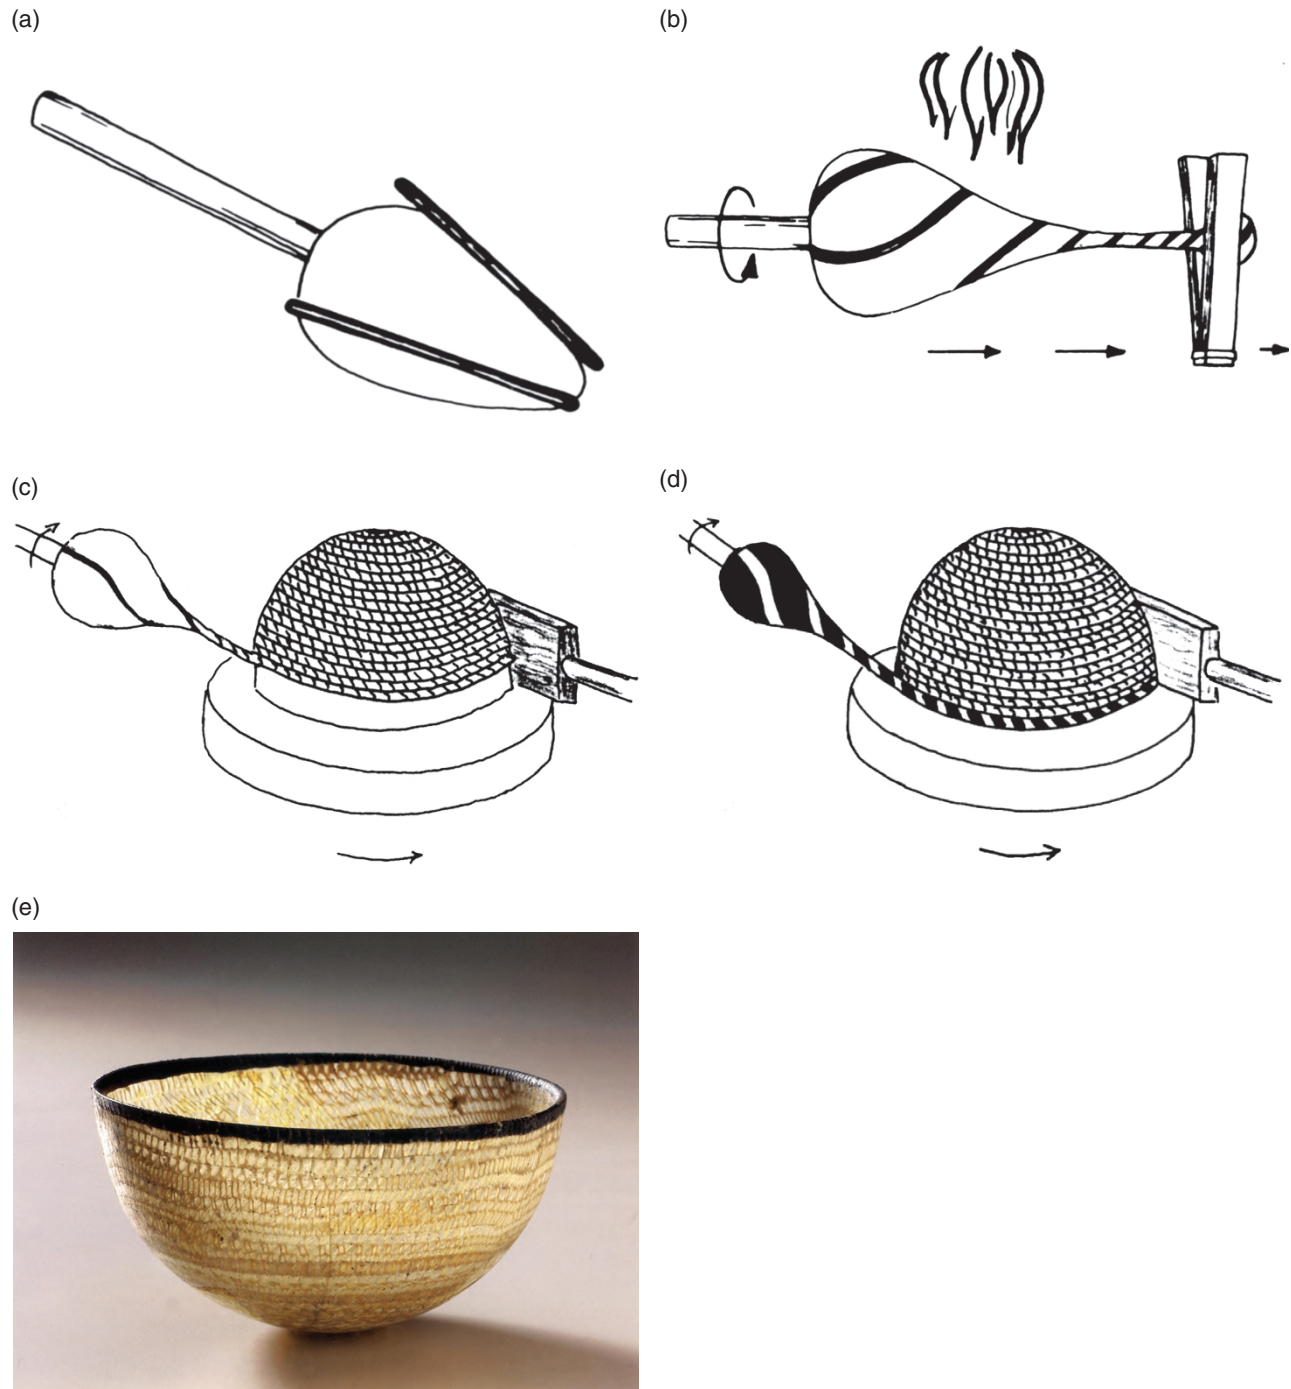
Making of spiral *reticella* vessel: drawing of the thread from a rotating conical bit of colorless glass on which two colored canes have been deposited; coiling of the thread around the mold, and final attachment of the rim made of a thicker thread of dark glass (Source: After [2]). Spiral reticella bowl (height 7.0 cm, rim diameter 12.8 cm.). Probably second half of second century BCE. Stuttgart, Landesmuseum Württemberg, inv. Arch 97/W73. Formerly Ernesto Wolf Collection. Source: After [1].
